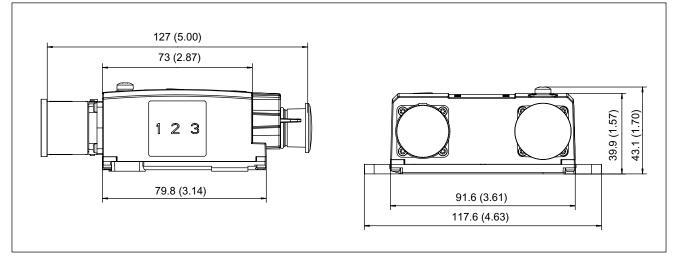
Dimension drawing SME125, Order number 6SL3055-0AA00-5KA3
